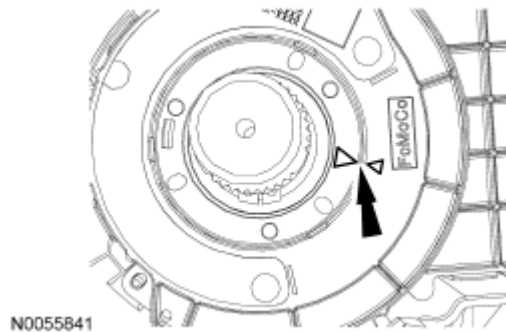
Making Sure Sensor Ring Arrow Is Lined Up With Absolute Steering Angle Sensor Housing Arrow
